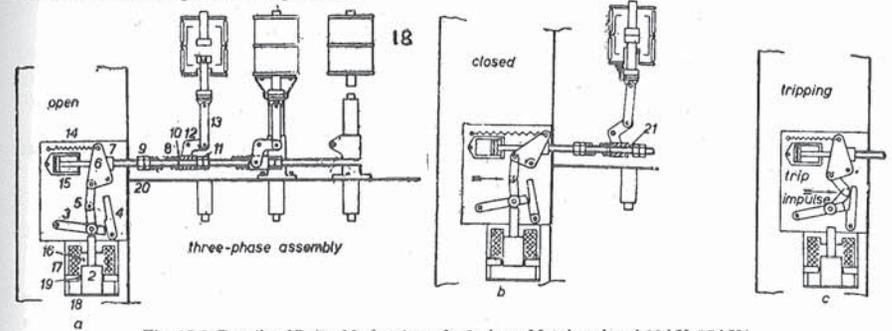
Details of Drive Mechanism of a 3-phase Metal enclosed 12 kV, 25 kVA Vacuum Switchgear with Solenoid-closing Mechanism.
